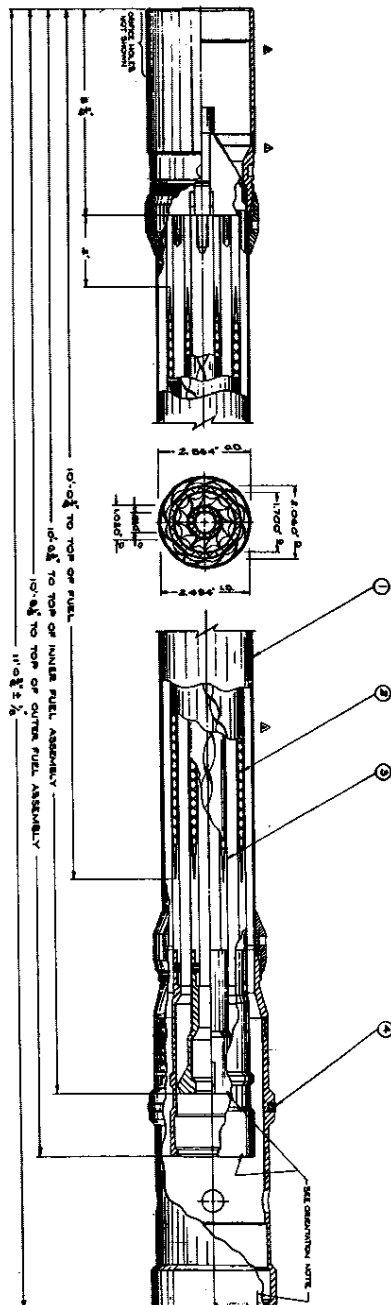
THIN-WALL NESTED TUBE (TWNT) FUEL ASSEMBLY
